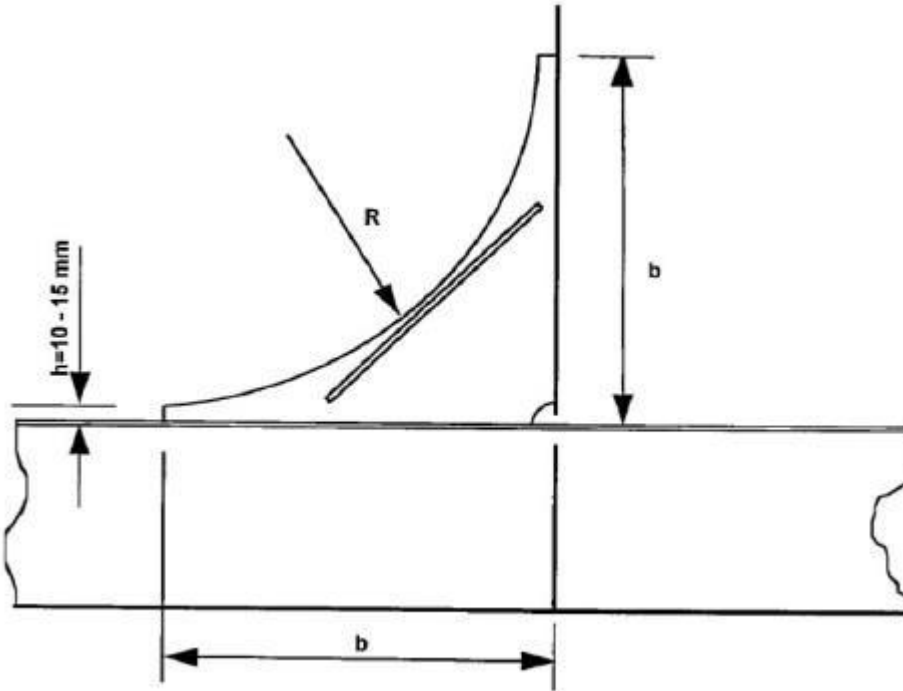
Technical Requirements for Connection Bracket / Reverse side of Tripping Bracket in location of Web Frame / Side Longitudinal (Stiffener fitted)
